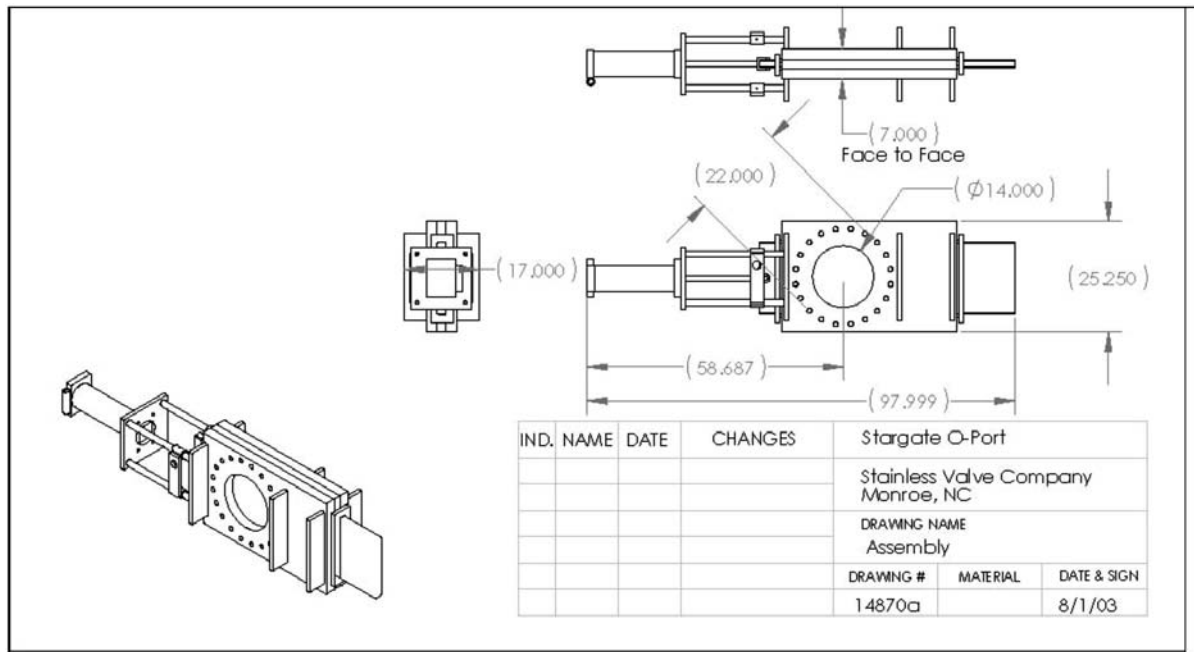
Engineering schematic of valve shown in Fig. 9.
